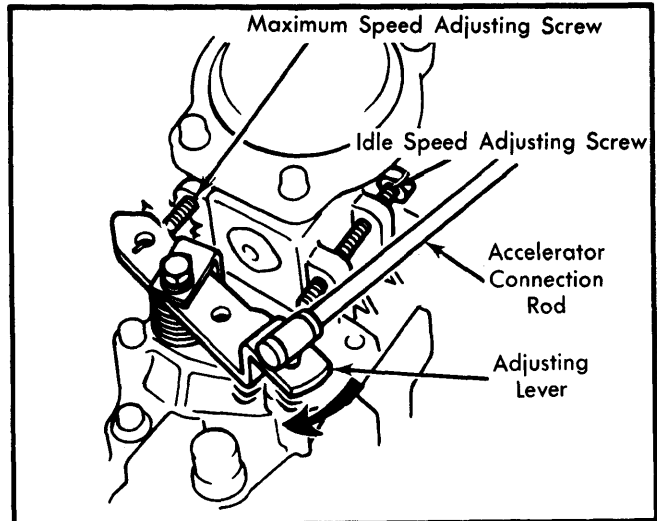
Idle Speed and Maximum Speed Adjusting Screws
